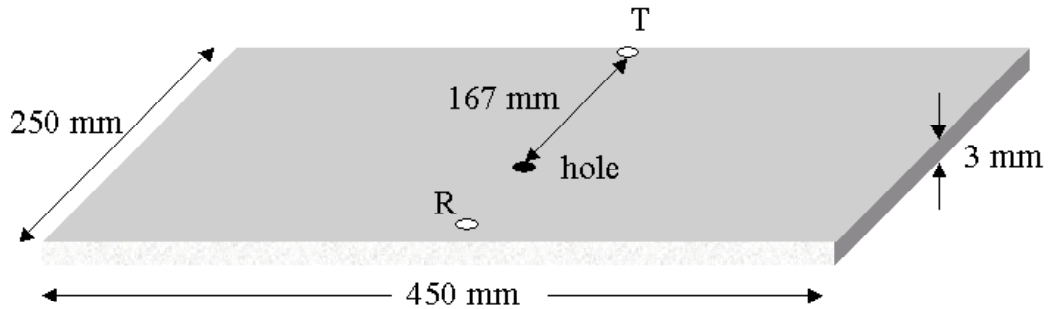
Schematic representation of the GFR specimen flawed by a hole. The transmitter T , receiver R and hole location are indicated.
